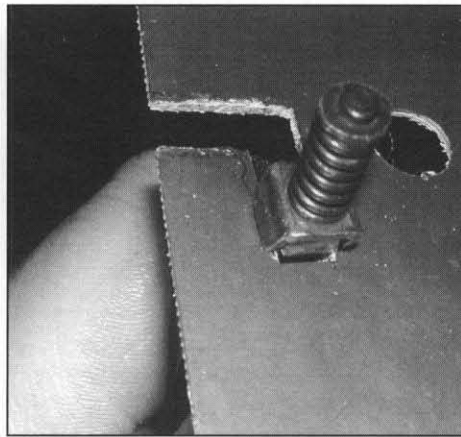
The nibbler in action, halfway through cutting a large rectangular piece out of the edge.
